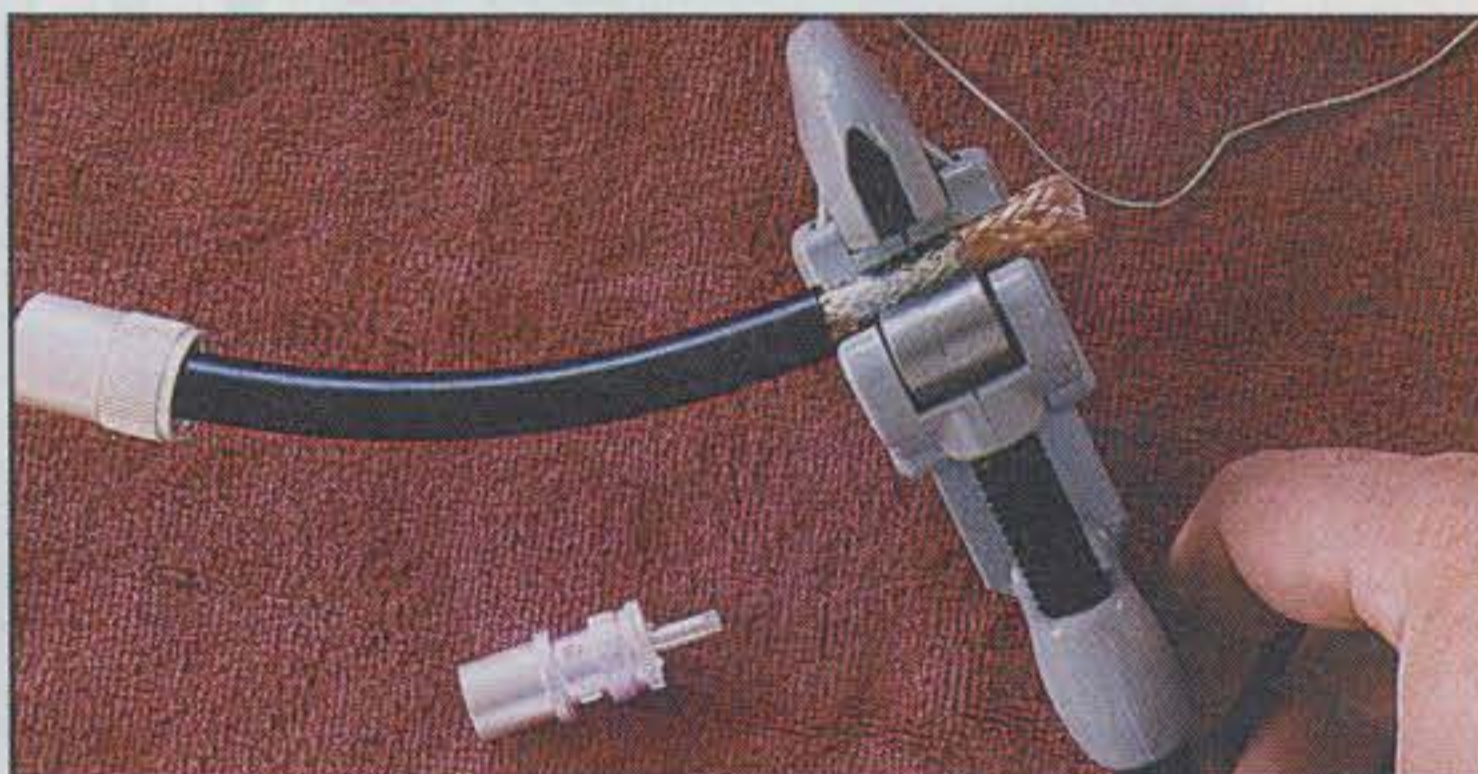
The tubing cutter makes removing the shield and center insulator quick and easy. Do not cut into the center conductor.
